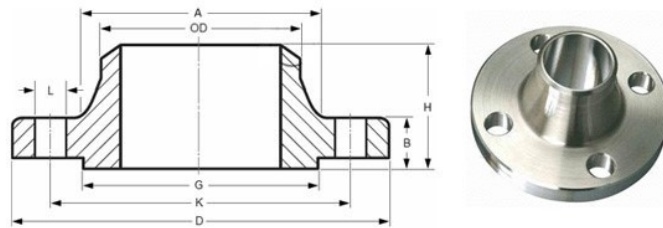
ASME B16.5 Class 150 Weld Neck Flanges
